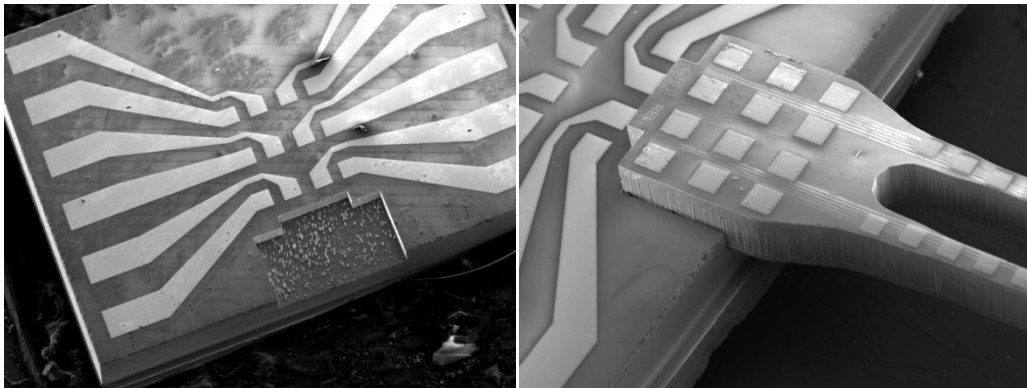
SEM pictures of dual shaft electrode carrier wafer, Left: Released carrier wafer with patterned metallization layer and etched alignment groove, Right: Electrode-wafer assembly before gold wire bonding
